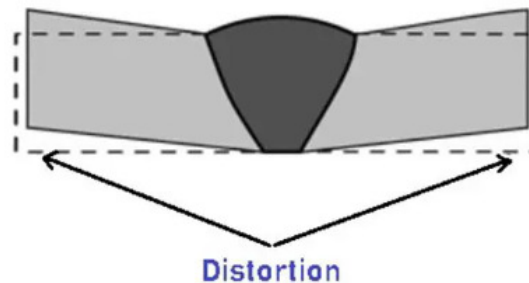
Representing the Distortion in welding [The Engineers Post].
